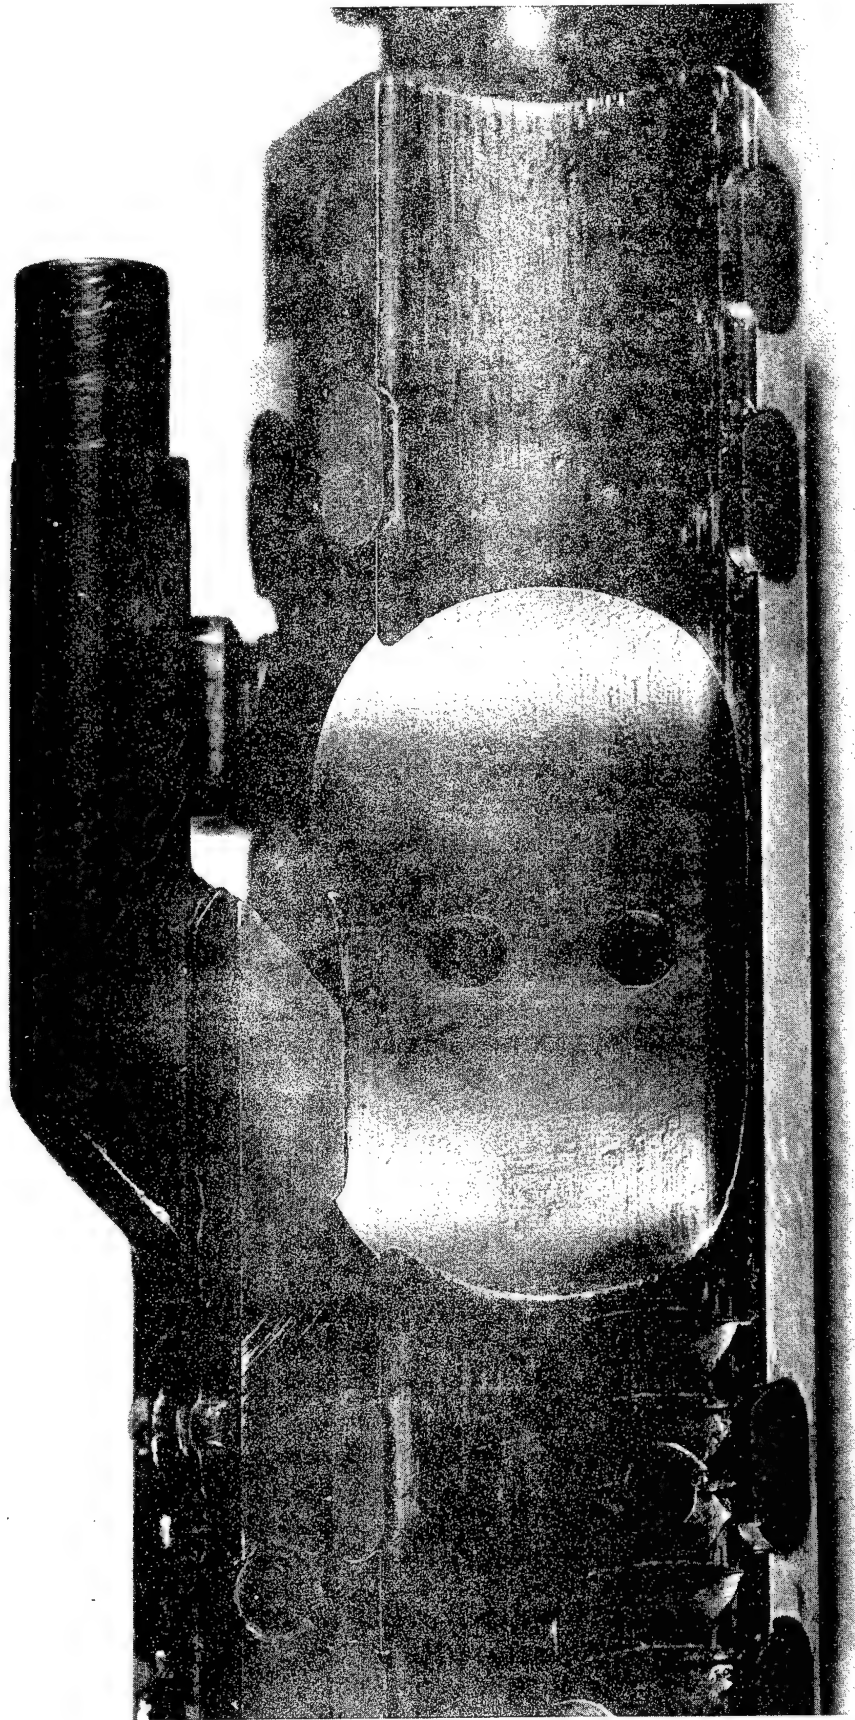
Right Side View of Bolt Carrier With Inserts Ready for Test.
